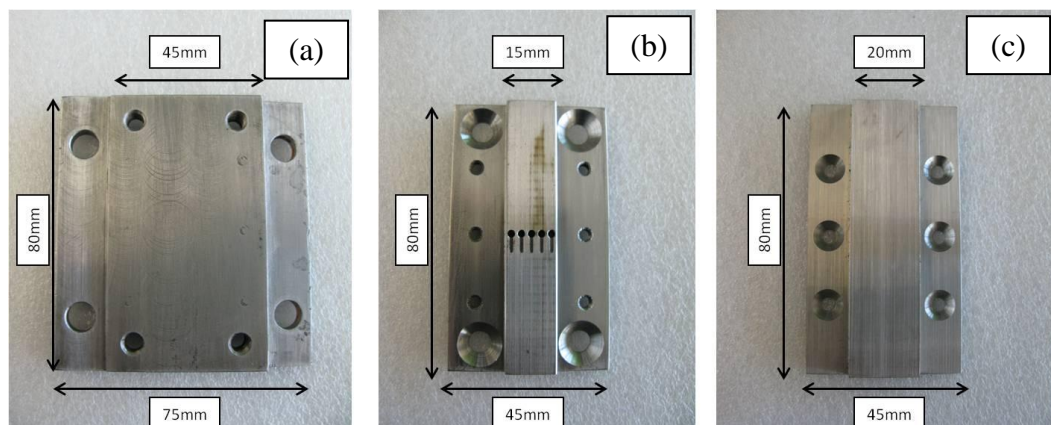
Individual components of test piece assembly; (a) Base Plate, (b) Thermo Plate, (c) Test Piece.
